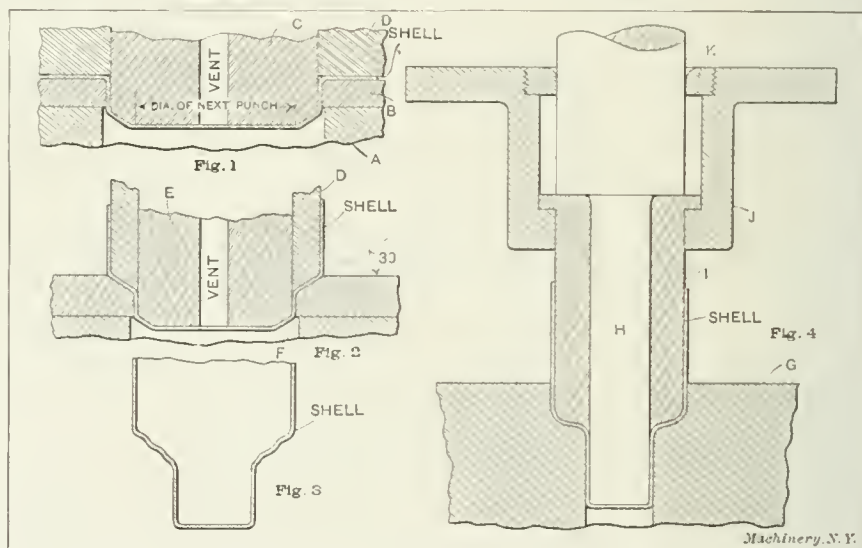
First Drawing Die. Fig. 2. Re-drawing Die. Fig. 3. Shape of the Shell after reducing the Shoulder. Fig. 4. Punch and Die for Finish Drawing the Shell
